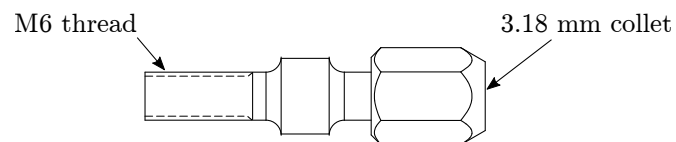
A drawing of the 6.35 mm to 3.18 mm shank CNC collet extension adapter modified by UMS to hold the quartz rod sample holder.
